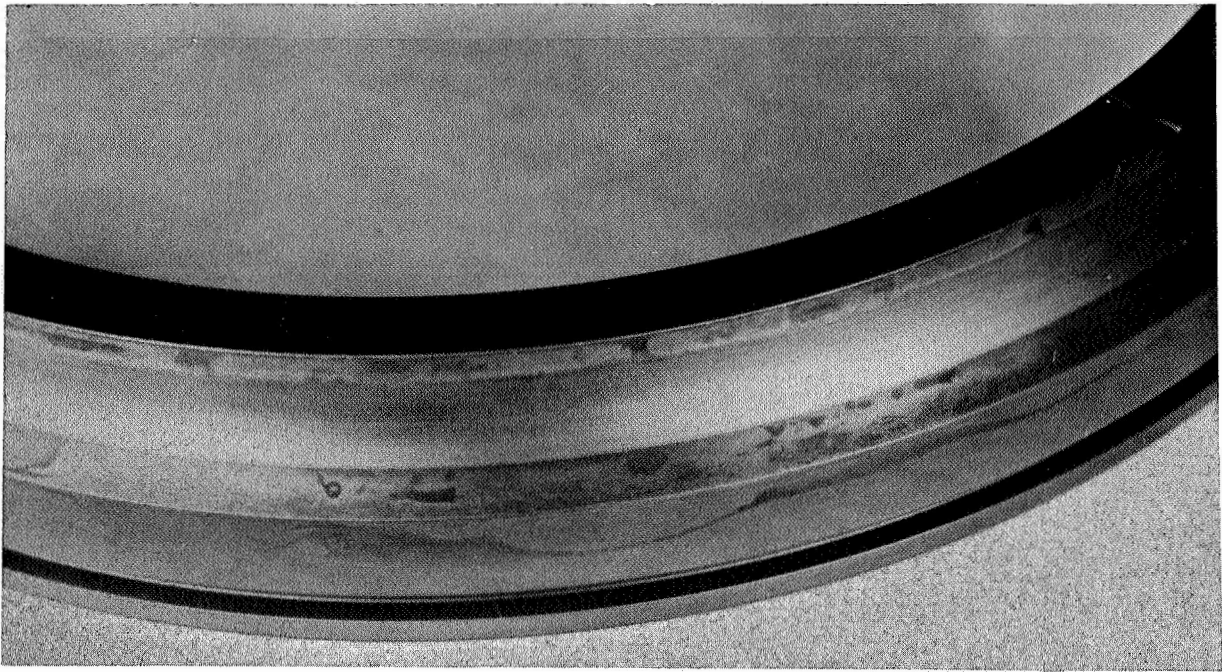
INNER RING BALL PATH - BEARING S/N 13
